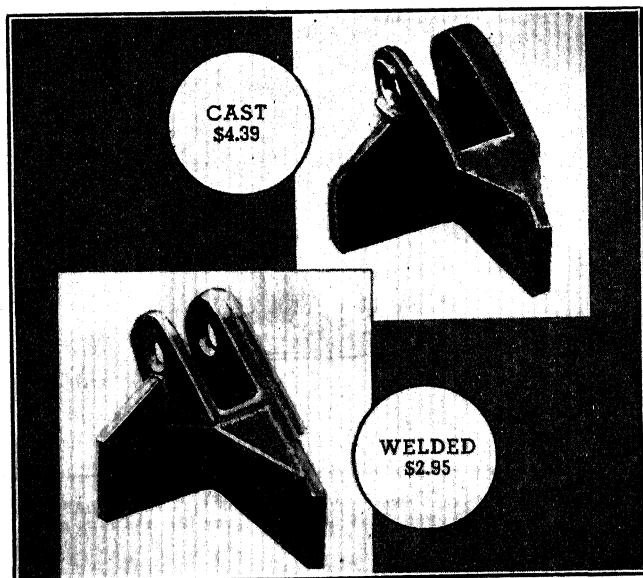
Built of cast steel, this bracket for a shovel bucket cost \$4.39. It was changed to welded steel construction at a saving of \$1.44 or 32%.
